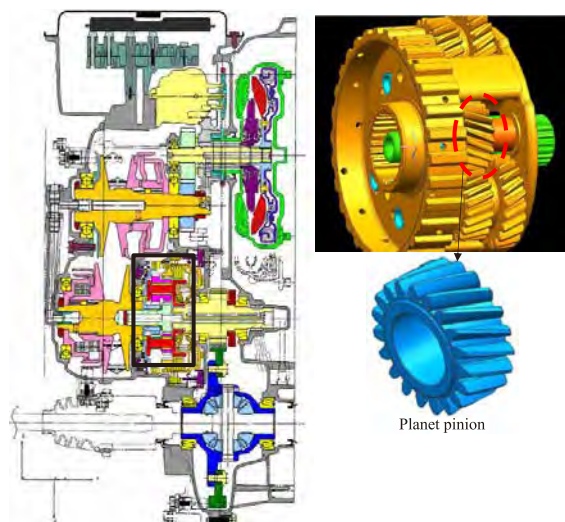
Planetary gears in auxiliary gearbox of CVT7
